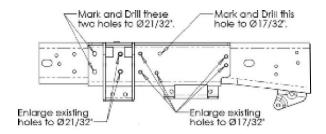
Passenger Side Upper Strut Mount Frame Drilling.
